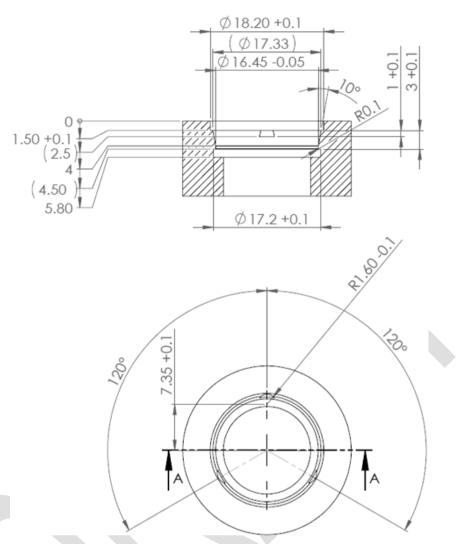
Dimension drawing: Workpiece drill hole for mounting the MDS D522 special version
